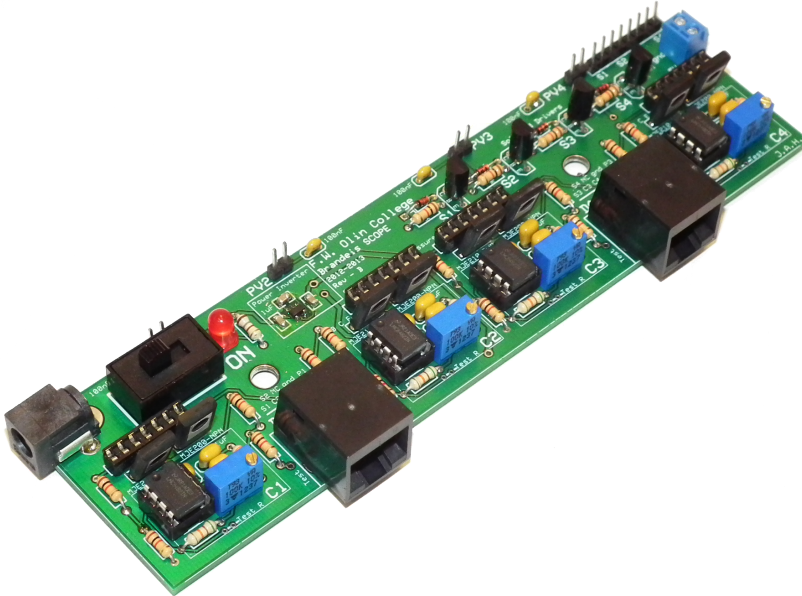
Populated PCB for use with the system. One board controls up to four pressure modules. One fully populated board is included in the handover package.
